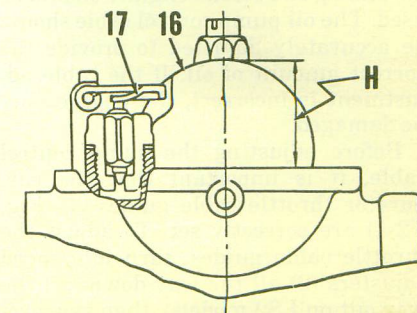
Float level (H) is adjusted by bending tang (17).
